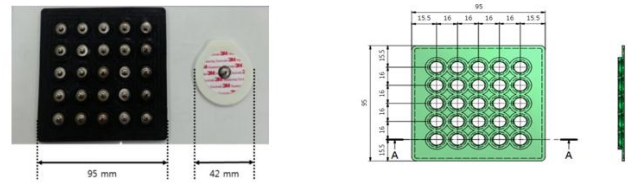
Appearance and design drawing of MSAE: (a) appearance, (b) design drawings.
